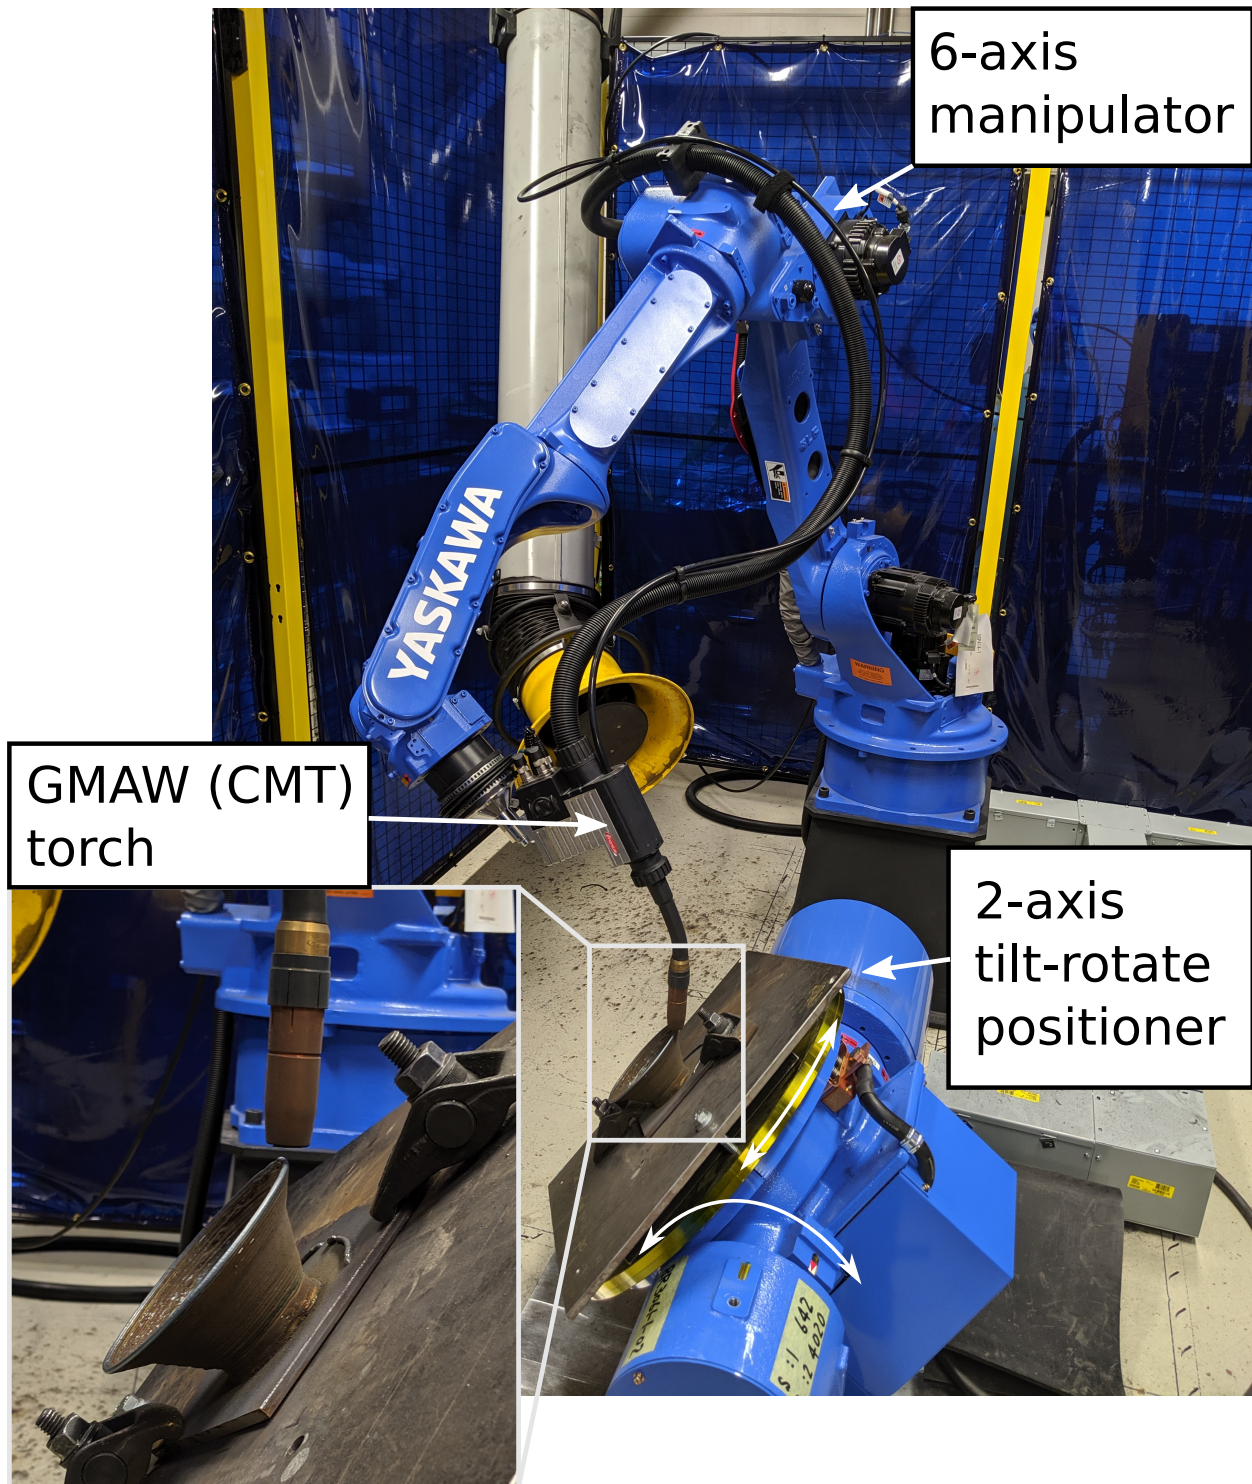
An example of a large-scale robotic AM fabrication platform using a wire and arc welding system for metal deposition.
